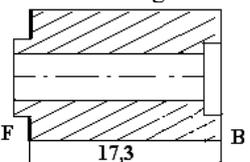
Chain elements tolerances of the workpiece dimensions.
